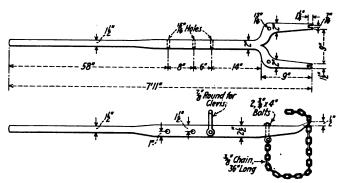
Device for Removing or Applying Heavy Locomotive Springs
